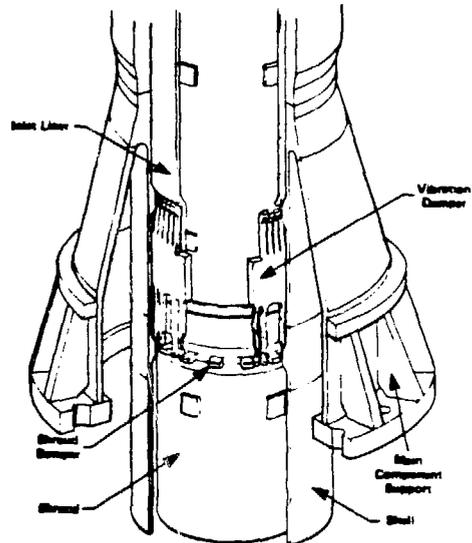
SHELL WELDMENT AND COMPONENT SUPPORT
